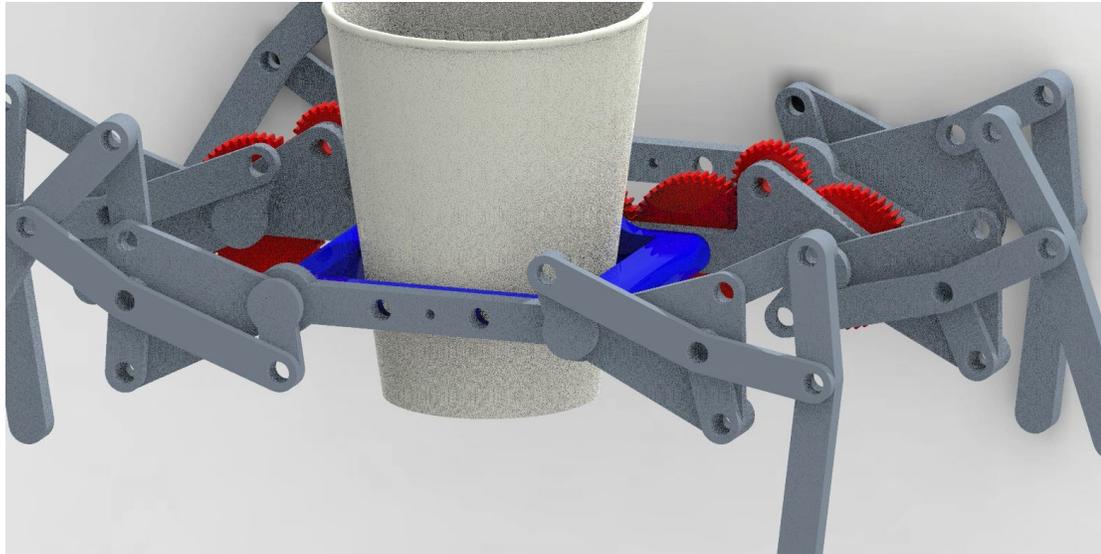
Improved Crank and Chassis Links to Reduce Failure
